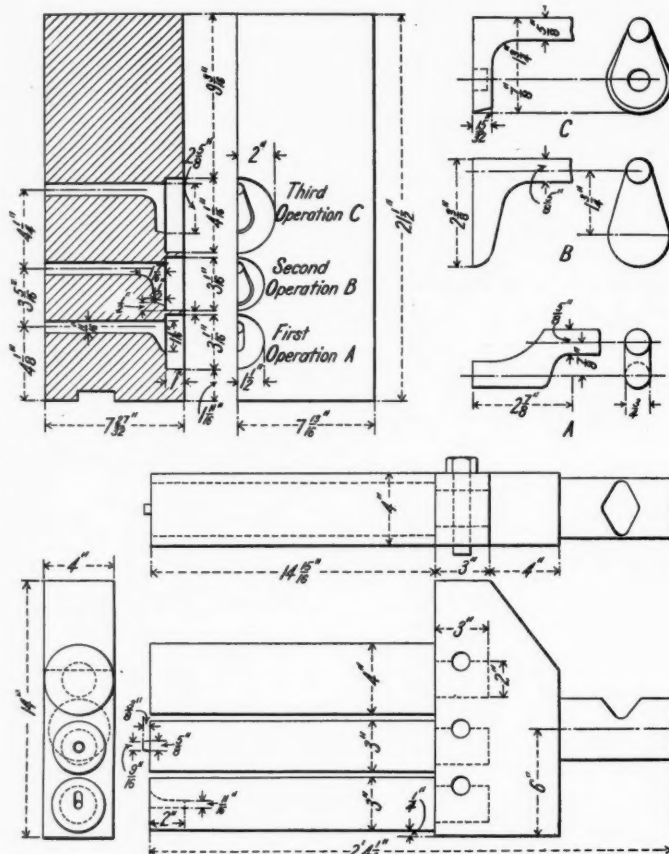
Details of Dies and Formers for Forging Ends on Ladder Treads.
